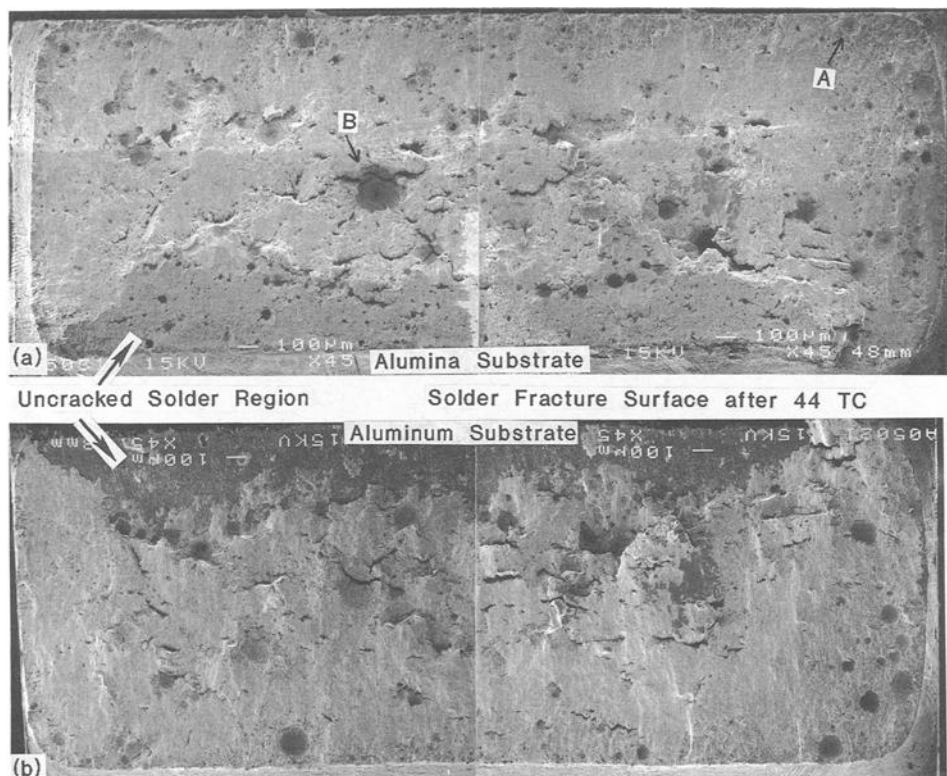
Fracture surfaces of 90Pb-10Sn solder joint subjected to thermal cycling between 40 and 140°C with 10-min hold and ramp: (a) on alumina beam, and (b) on aluminum beam.
